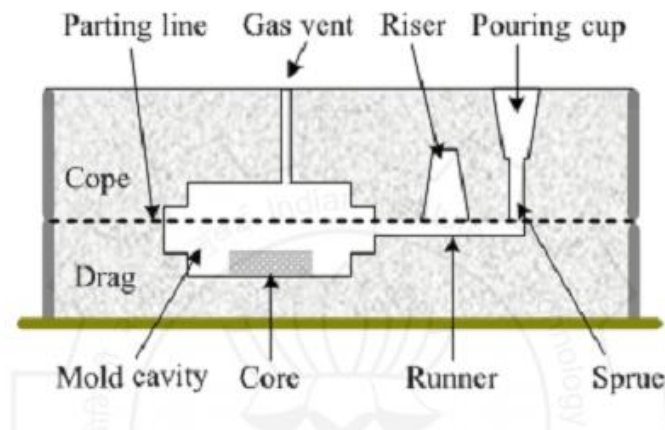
Schematic Set-up of Sand Molding/Casting Process
